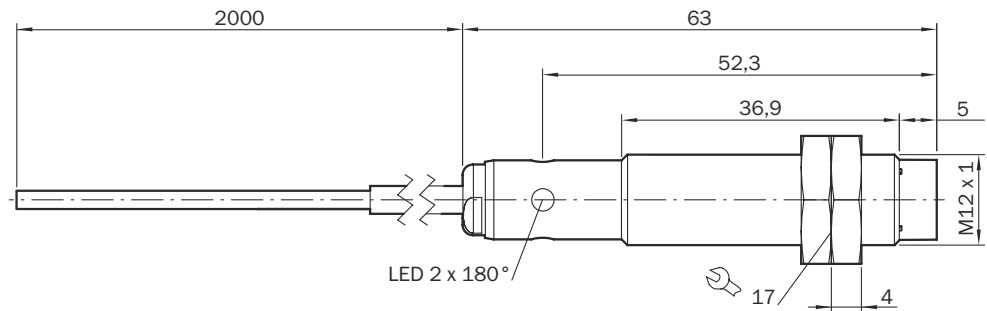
IME2S12-\*\*N\*\*W2 dimensional drawing
